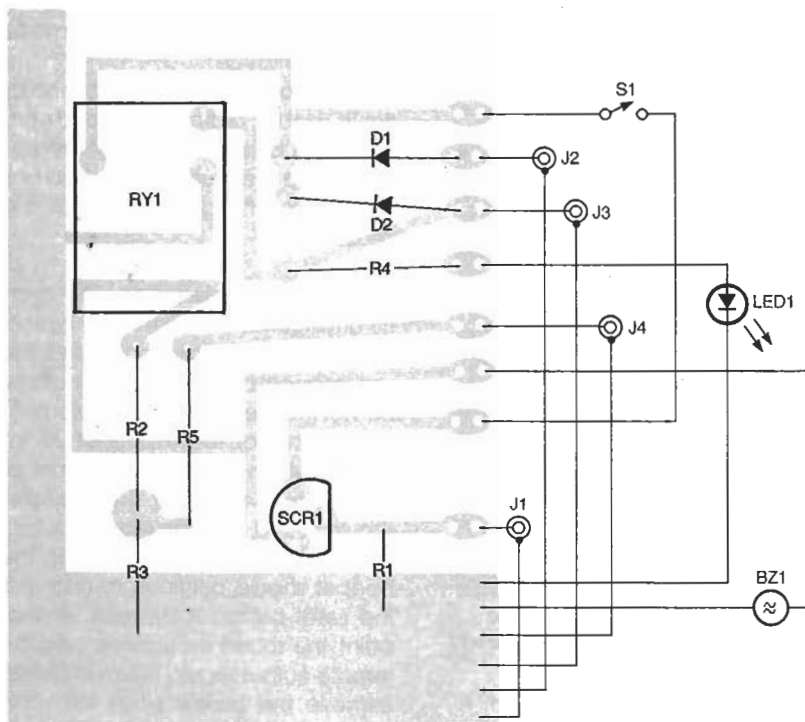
If you want to etch a PC board from the foil pattern, use this placement diagram to locate the parts.
